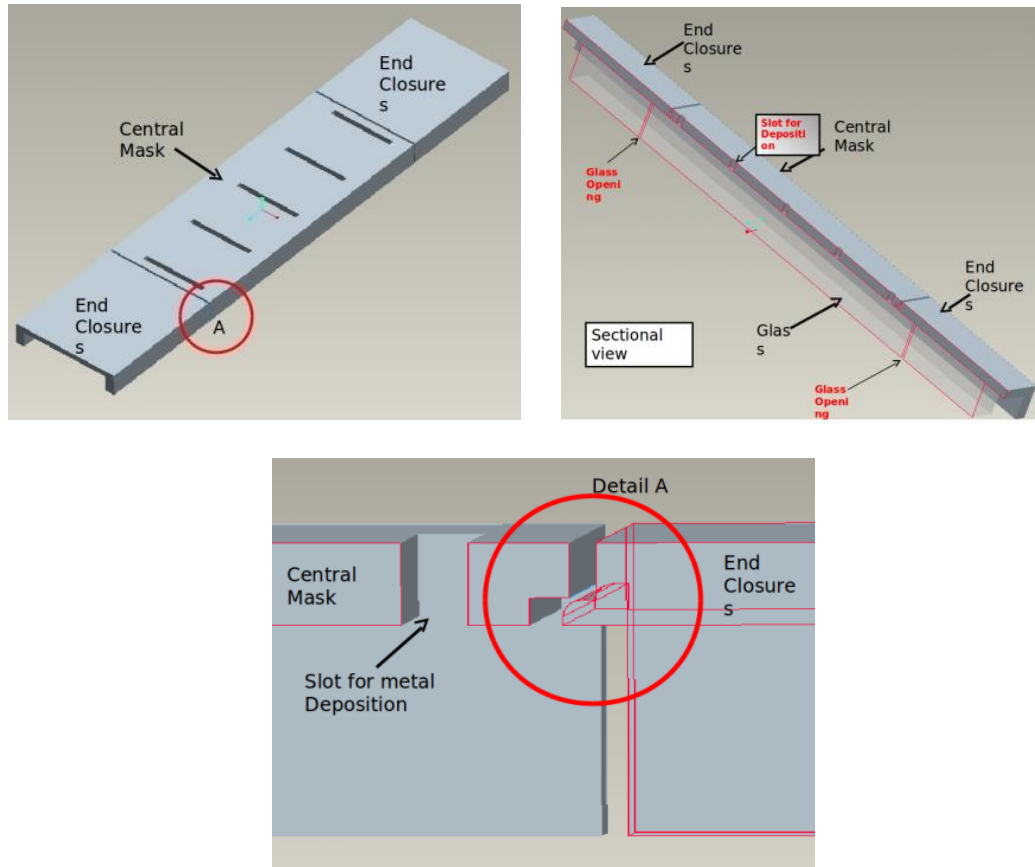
Electrode chip mask design drawn in CAD software.
